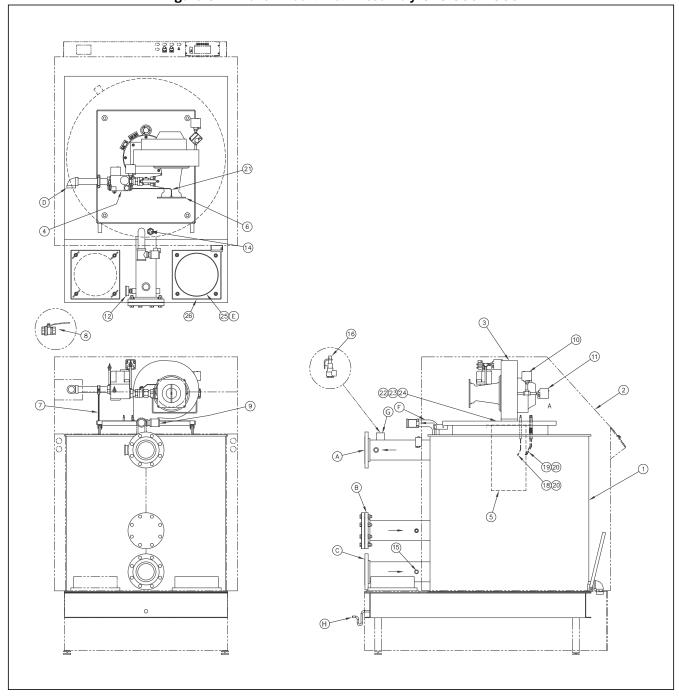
Boiler Mechanical Assembly CFC 500-2500
